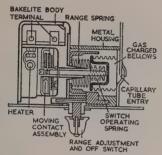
The thermostat ("cold control") or heat-controlled motor switch.
